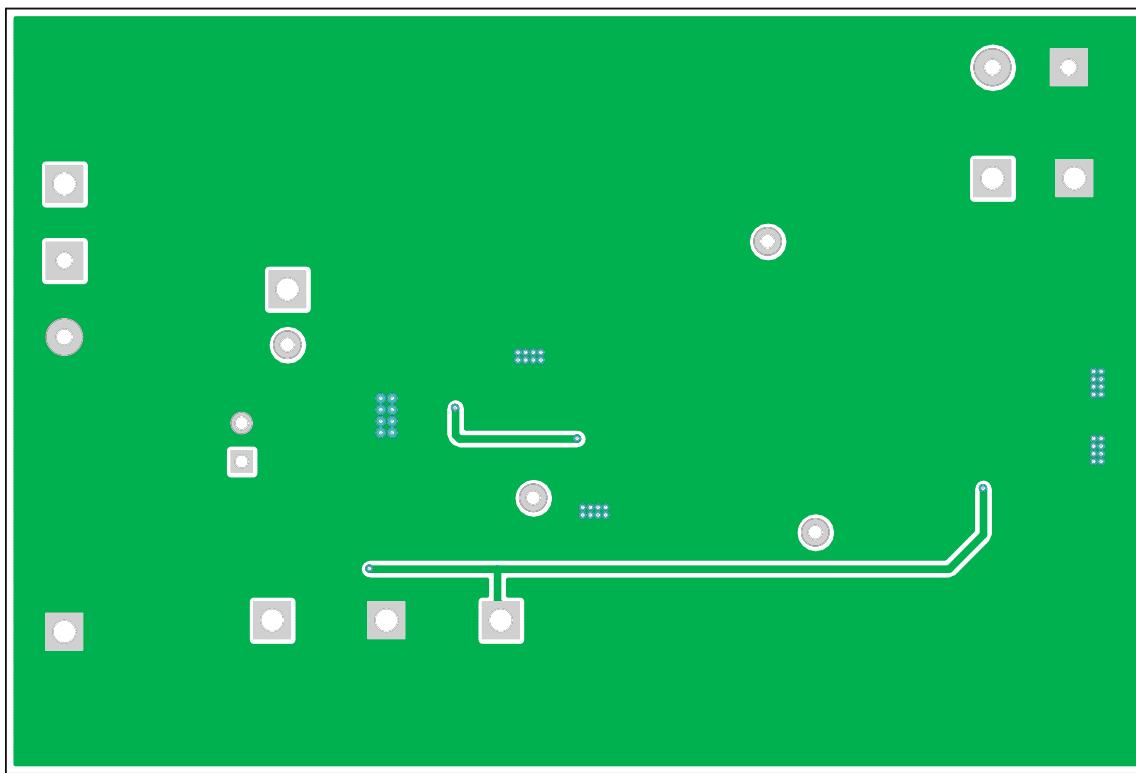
through Figure 5-3 show the design of the TPS40077EVM-001 printed circuit board. The EVM has been designed using a double-sided, 2-oz copper-clad circuit board, with all components on the top side to allow the user to easily view, probe, and evaluate the TPS40077 in a practical application. Moving components to both sides of the PCB or using additional internal layers can offer additional size reduction for space-constrained systems.
